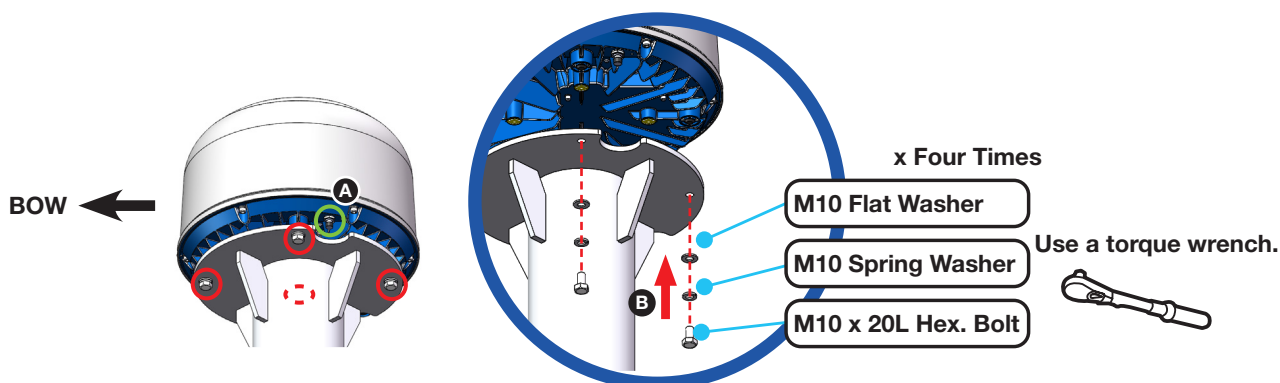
Mounting Antenna using Outer Holes (with M10 Bolts)
